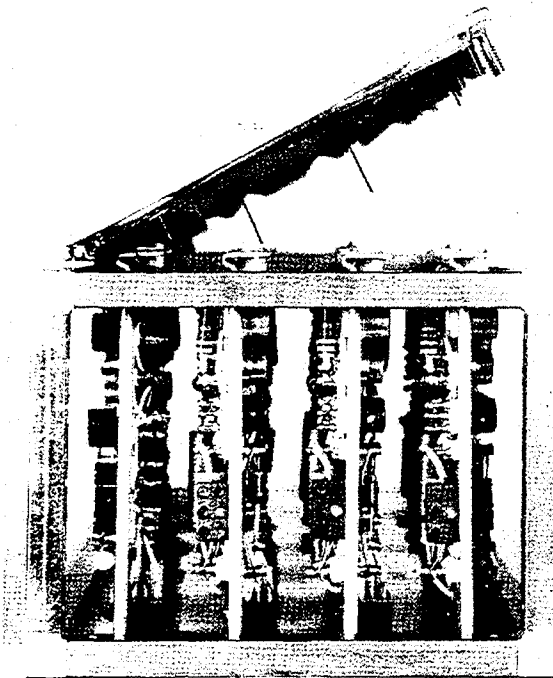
Side view of a sample frame section with arrows illustrating module loading theory.
